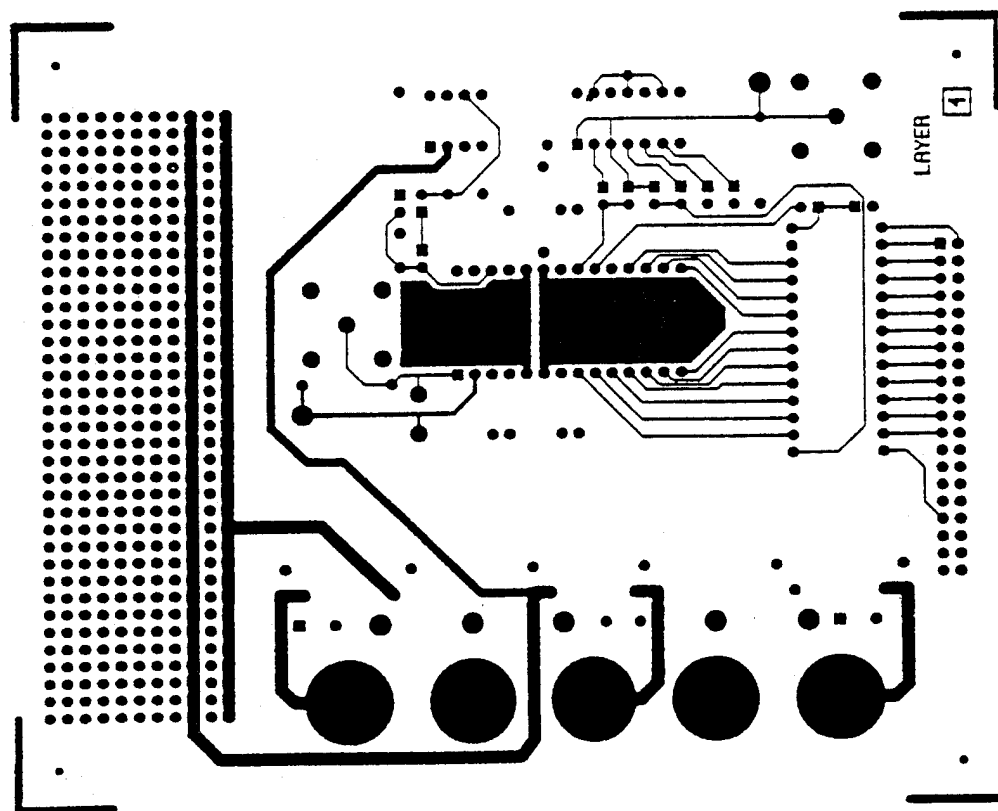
Solder Side PCB Layout (Not Shown to Scale)
